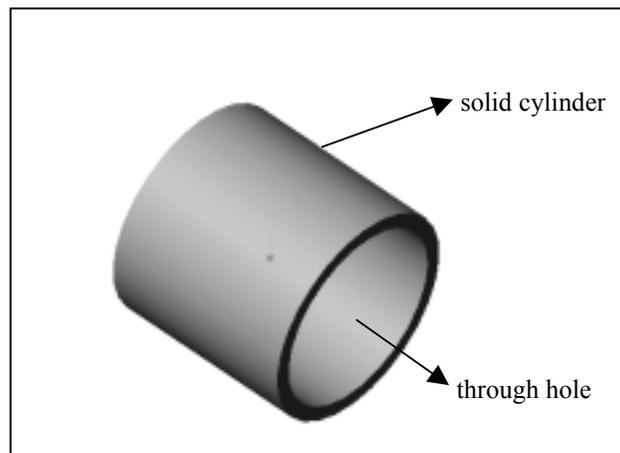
A hollow axial is created by extruding and cut-extruding
